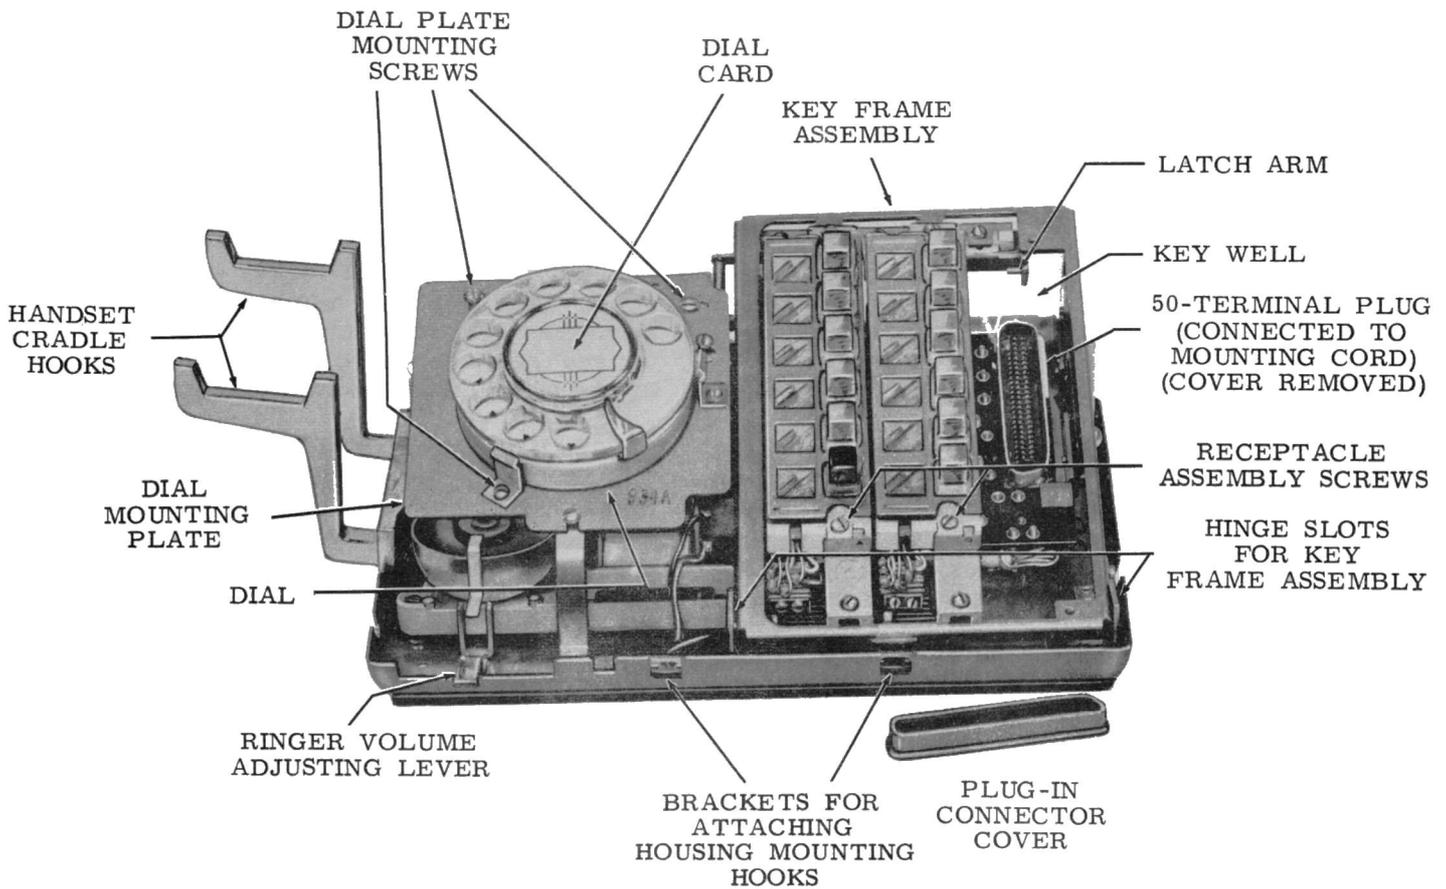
Type 860A with key blank and cover of plug-in connector removed (ready for installation of third key-strip unit).
